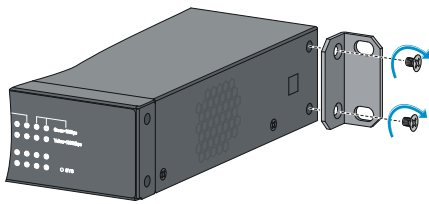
Attaching a four-hole mounting bracket to the front mounting position on an HP 1950-24G-2SFP+2XGT-PoE+(370W)_switch
